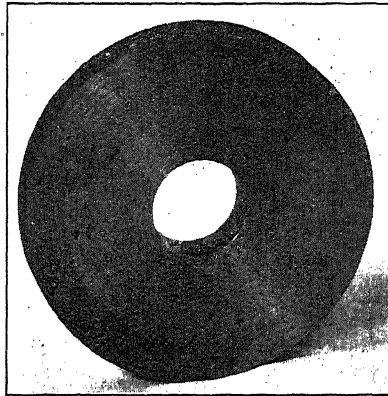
TUNGSTEN HIGH-SPEED RING AUTOMATICALLY WELDED BY METALLIC-ELECTRODE ARC PROCESS TO COLD-ROLLED CORE TO FORM MILLING-CUTTER BLANK.
